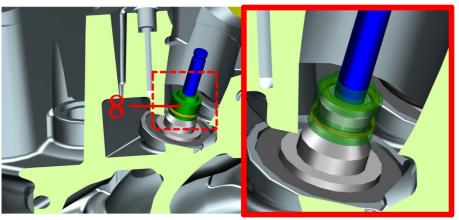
CYLINDER HEAD		Disassembling the valve	CHK	(0)
